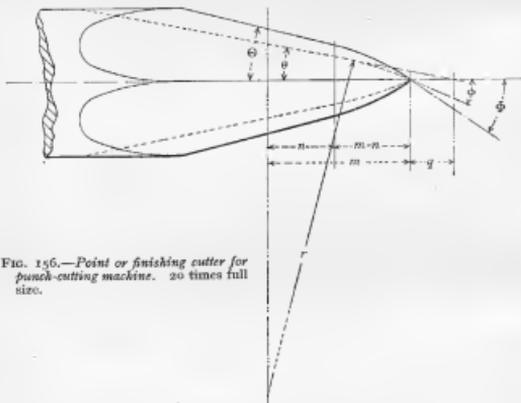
Point or finishing cutter for punch-cutting machine. 20 times full size.
